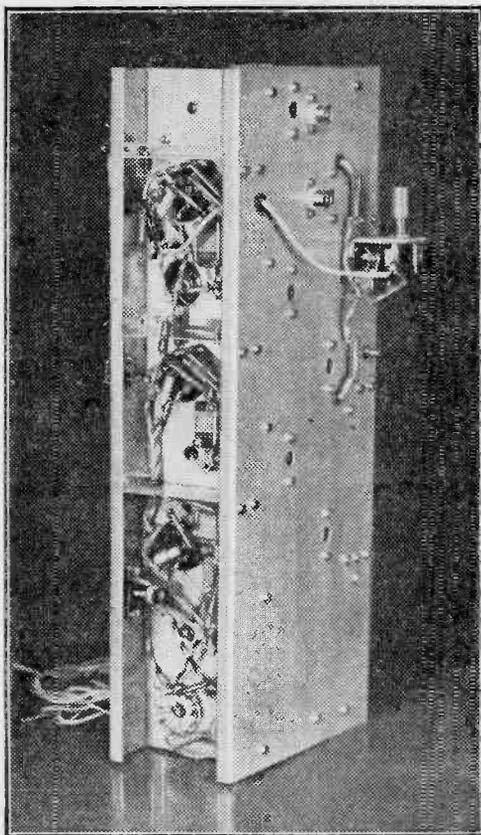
This alternative view of the chassis should be studied in conjunction with the cover illustration.
